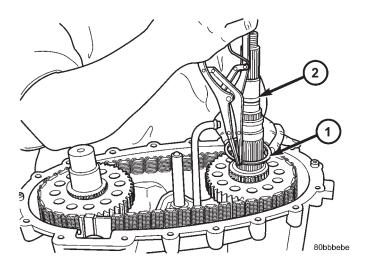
Install Output Shaft Drive Gear Snap-ring
